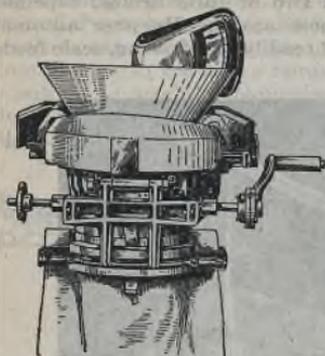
Dustite bag holder. A conveniently placed spring clip holds the bag preparatory to clamping and the entire bag opening is completely closed and held tight in one operation.
